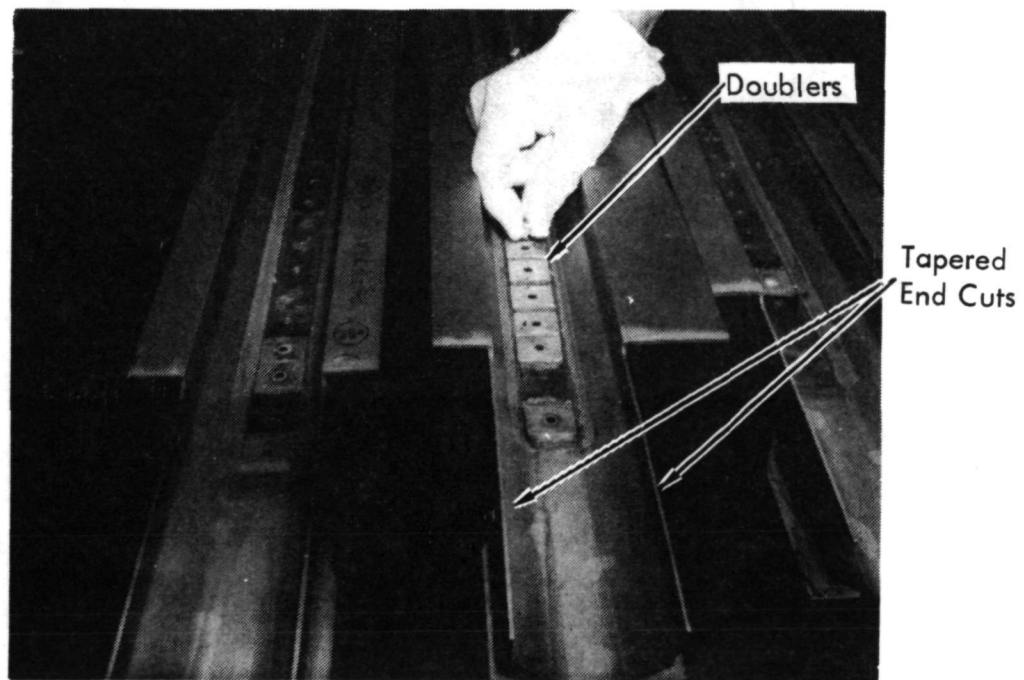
ALUMINUM DOUBLERS IN STRINGERS
